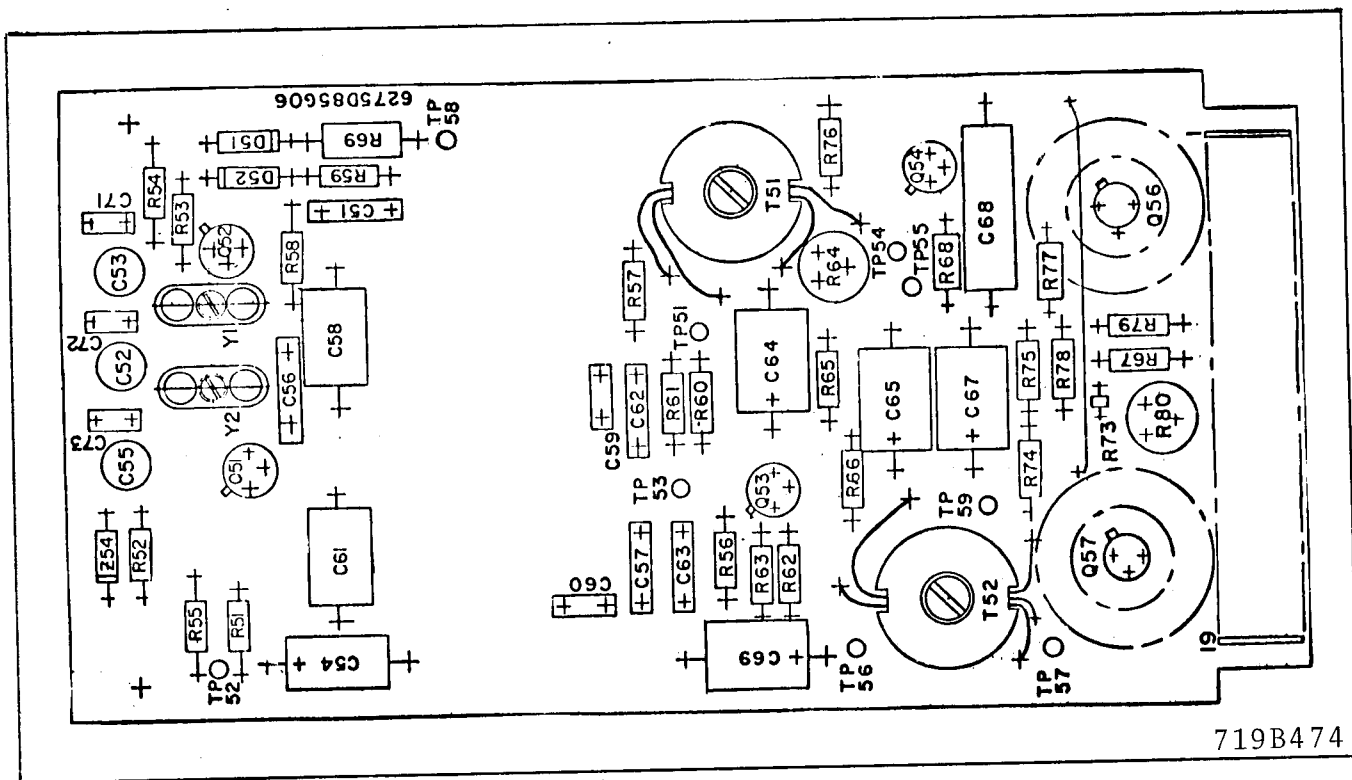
Component Locations on the Transmitter Printed Circuit Board.
